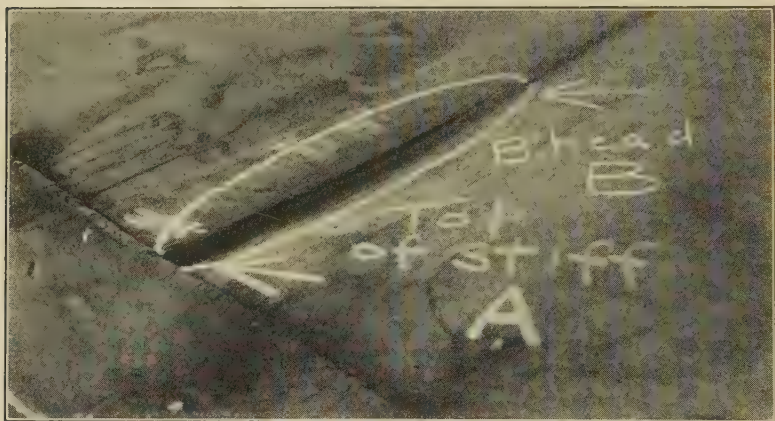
Split in welding at the top of stiffener A, bulkhead B.
